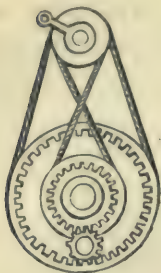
The small pulley at the top being the driver, the large, internally-toothed gear and the concentric gear within will be driven in opposite directions by the bands, and at the same time will impart motion to the intermediate pinion at the bottom, both around its own centre and also around the common centre of the two concentric gears.
